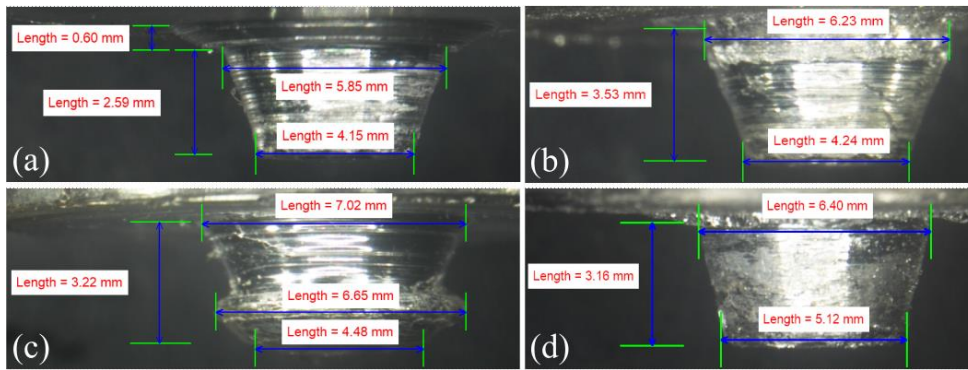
Variation in the tool pin geometry when welding at 1200 rpm (a) weld material is adhered to the tool surface and (b) the weld material is removed from the tool surface when the tool traverse speed is 60 mm/min, and (c) weld material is adhered to the tool surface and (d) the weld material is removed from the tool surface when the tool traverse speed is 90 mm/min
